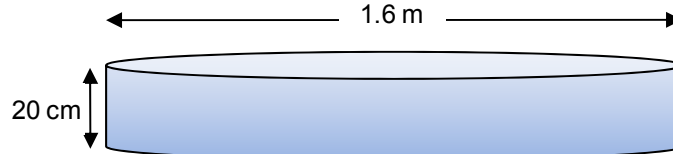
The 1.6 m Zerodur® flat mirror blank geometry.
